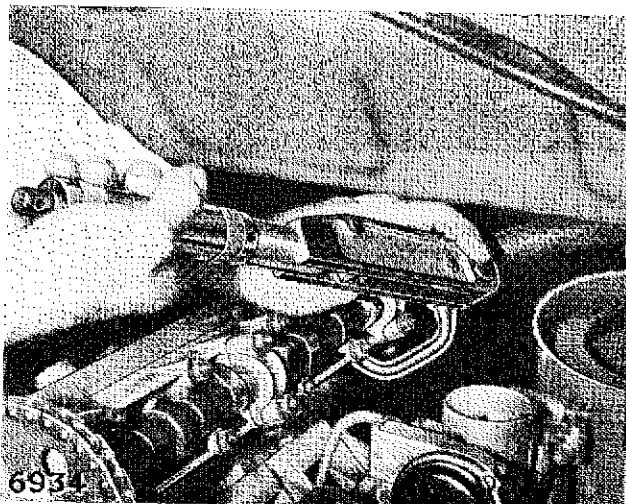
Churchill spanner RG355 for tightening cylinder head bolts with camshaft in position
